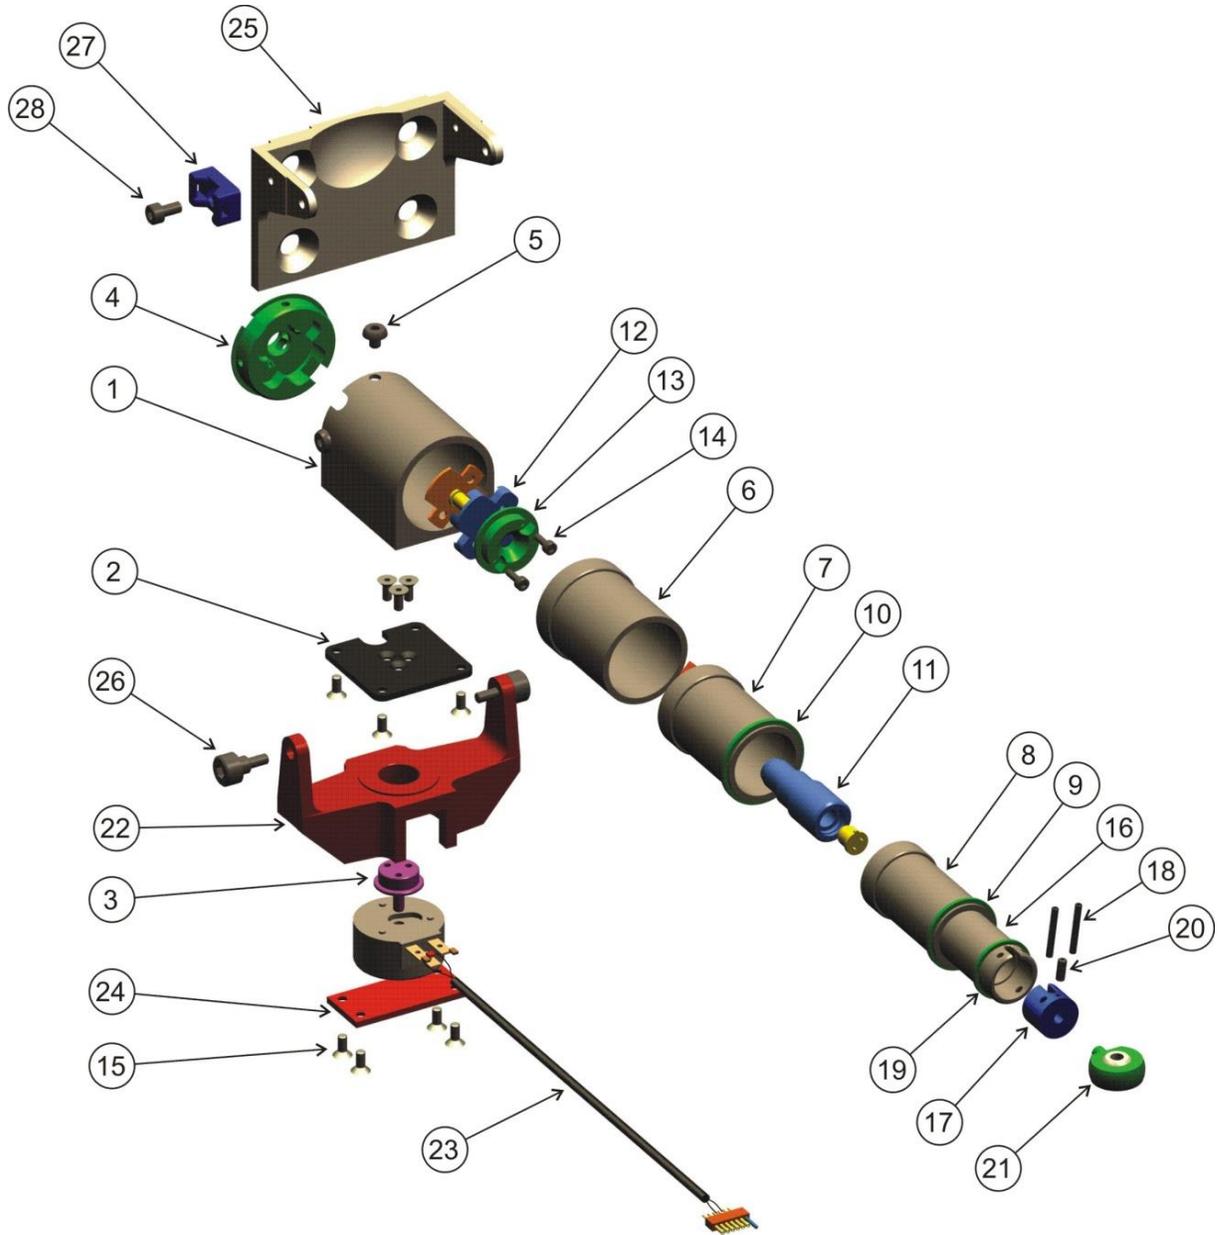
2D-IR-TRACC Exploded Assembly, 3710-00
